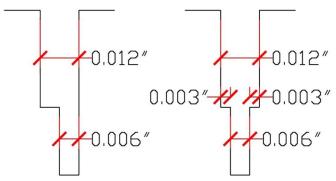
Flaw dimensions (depth), undesired (left), desired (right)
